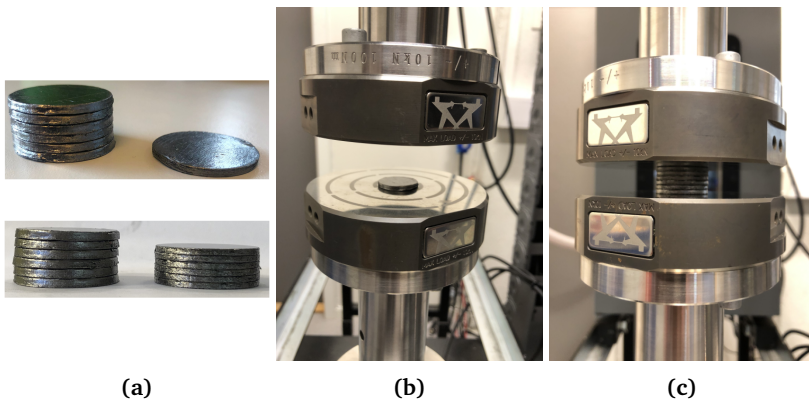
(a) Single sheet and stacked specimens' geometry and stack specimen residual deformation (top and bottom, respectively). Testing example of single sheet (b) and stacked (c) specimens.
